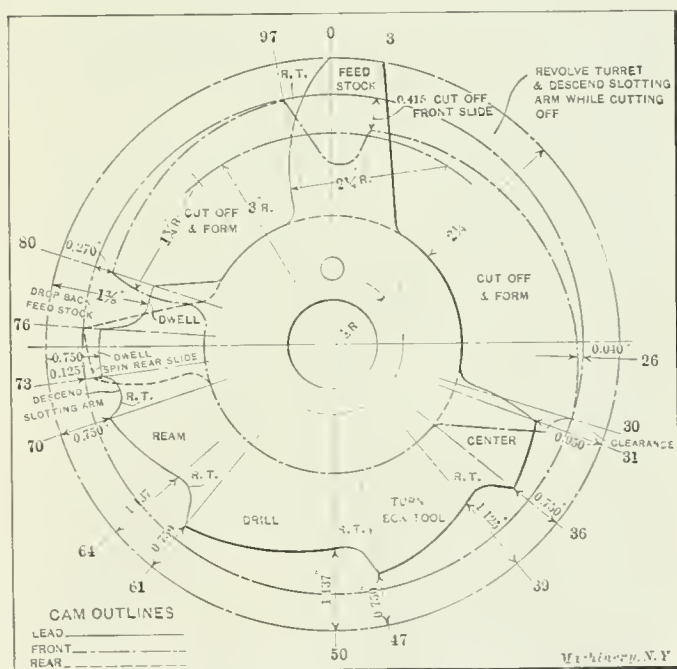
Cams used for Making and Assembling the Grooved Roller and Socket Joint
